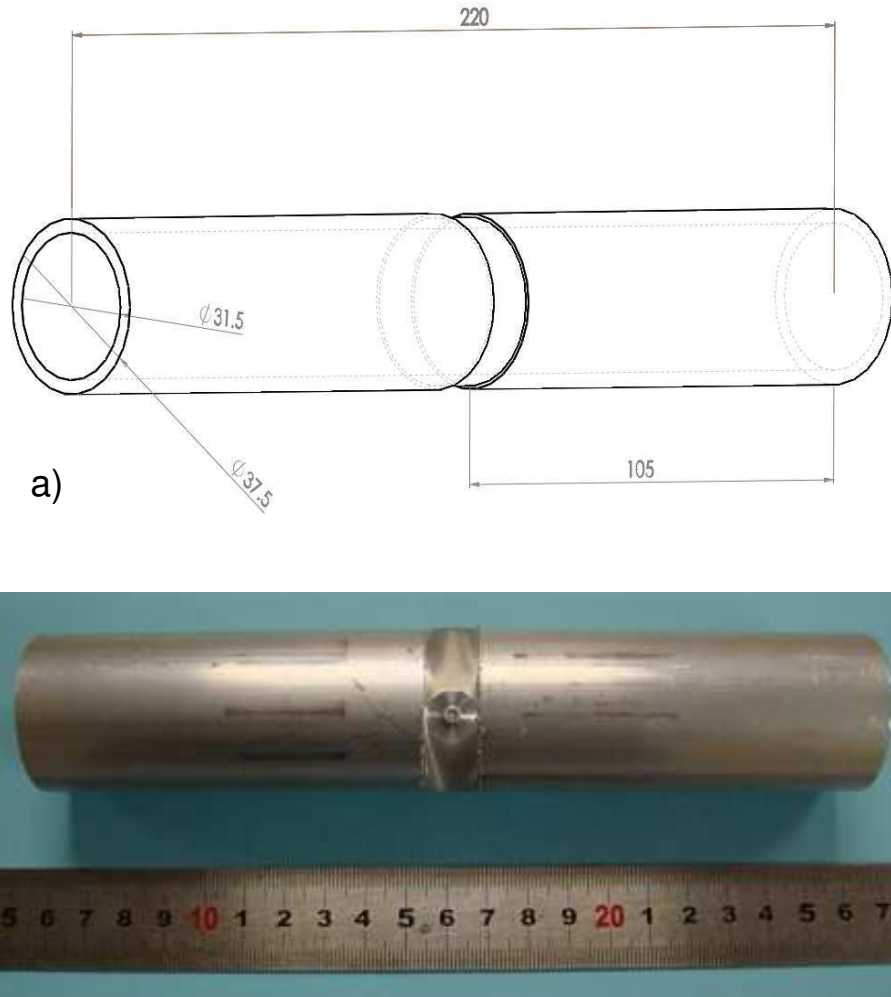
a) Approximate dimensions of the tubular fatigue specimens. b) Image showing a typical welded specimen.
